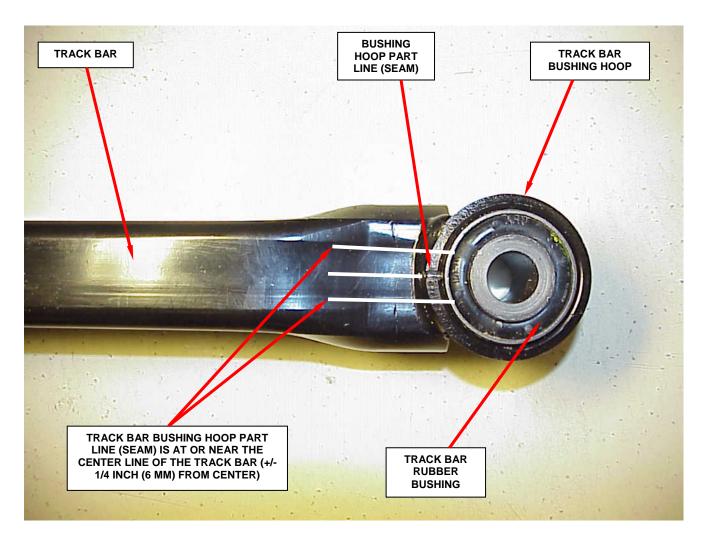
Inspect Bushing Hoop Part Line Location
